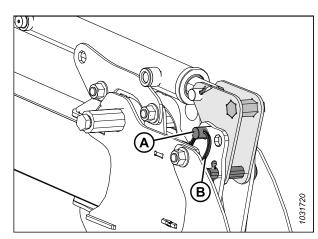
Fore-Aft Cylinder Adjustment Type 1 – Aft Position
